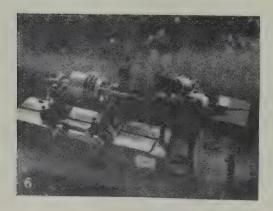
ROTOR BEING BALANCED IN A DYNAMIC BALANCING MACHINE
